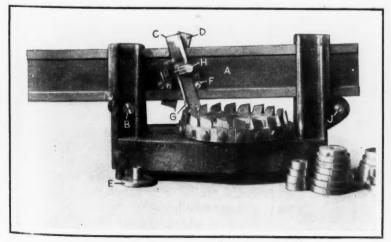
Adjustable Sine Bar Used for Inspecting the Cutter-heads for Spiral Bevel Gear Generators
